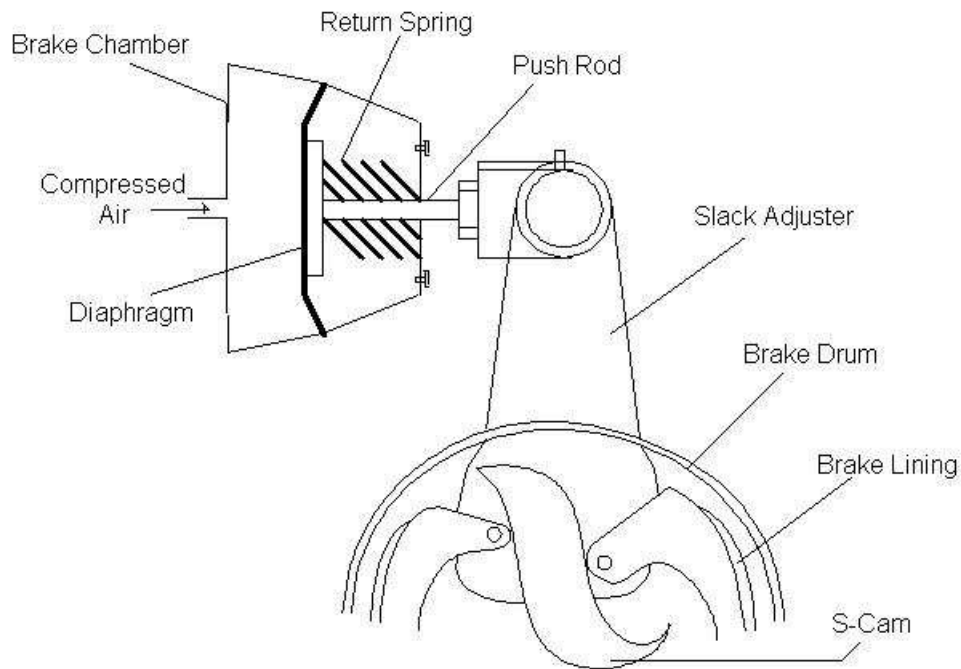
Schematic of a drum brake along with the brake chamber and push rod
